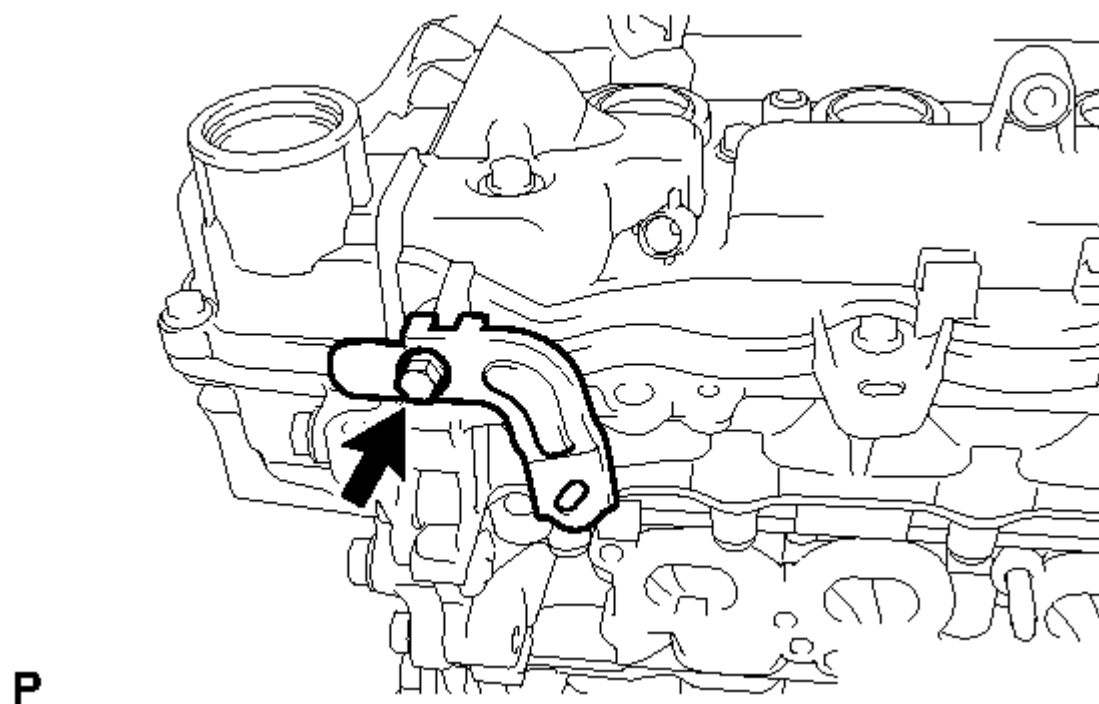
Identifying Wiring Harness Clamp Bracket Bolt
